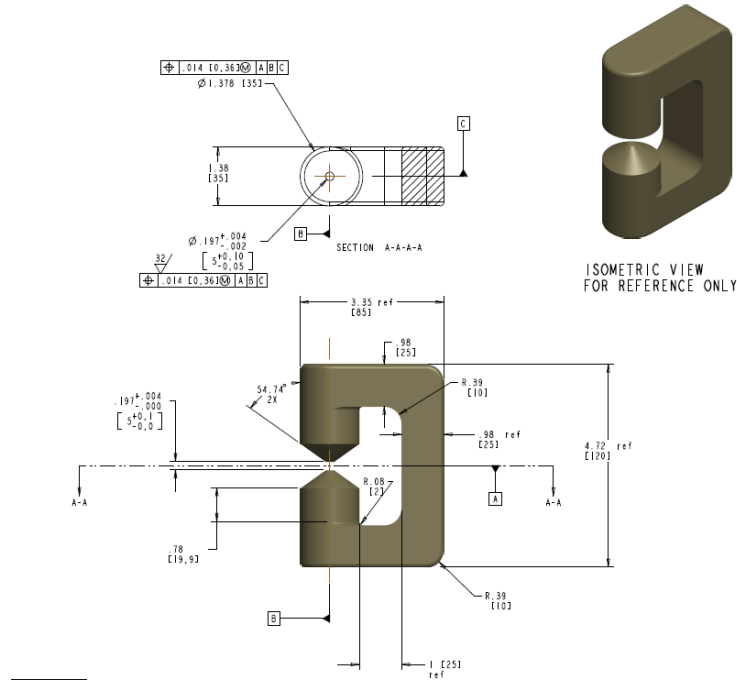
Morphology of electromagnet C-shaped core, 2D drawing for CNC machining of hiperco50A core
